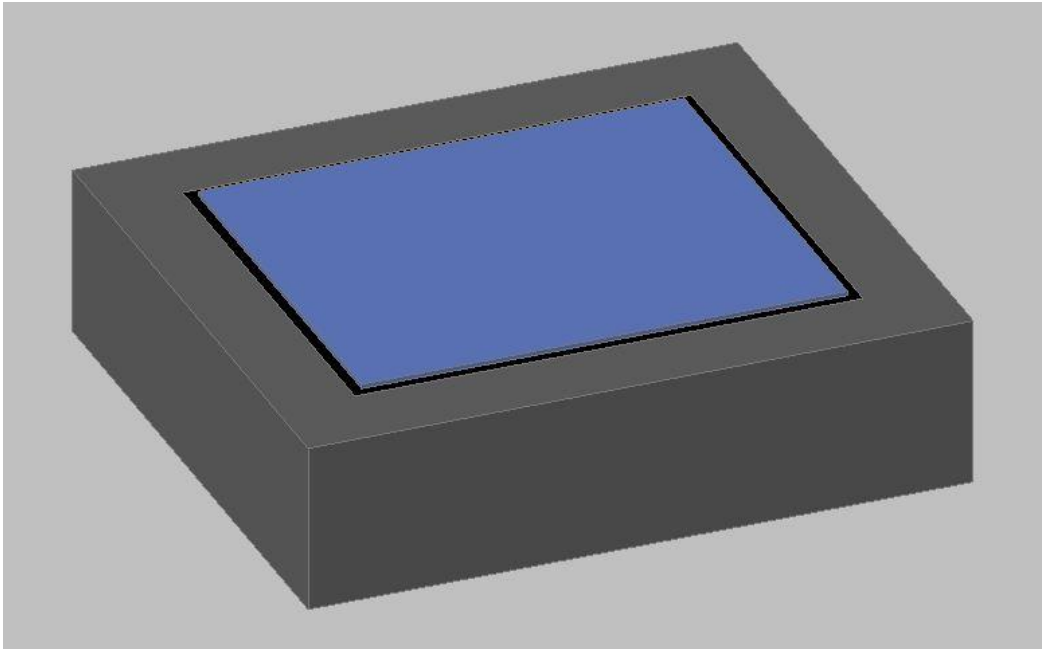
Chart. Three dimensional view of the Assembly Design IV
